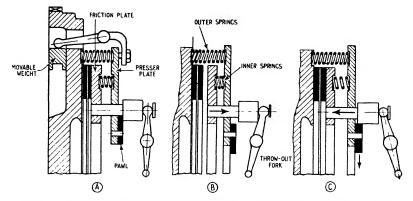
(A) When engine is running the pawls fly outwards and are kept in position by centrifugal force; (B) when engine is stationary and the clutch pedal depressed, the pawls are disengaged; and (C) when the pedal is released the clutch is engaged
